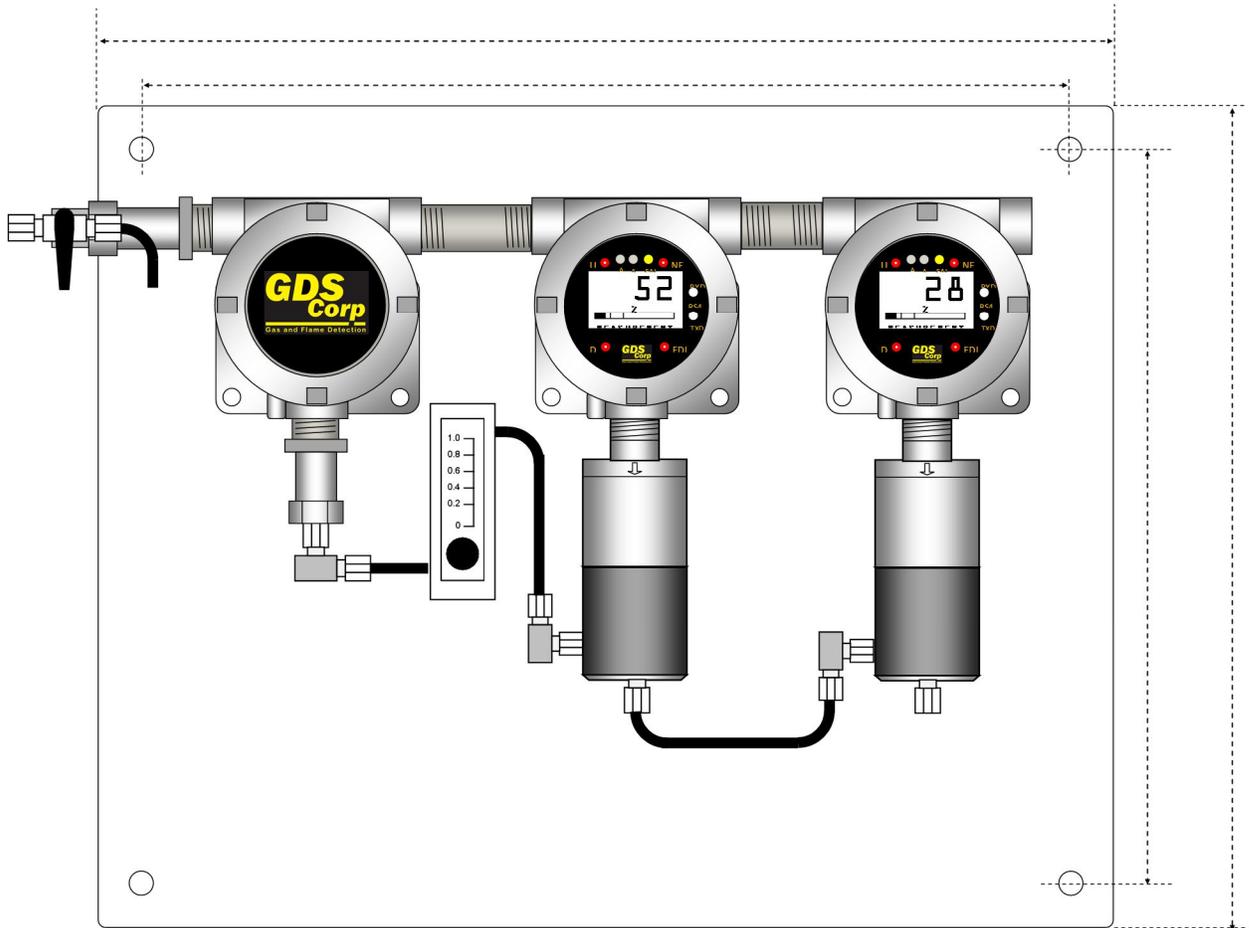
GDS-58XP 21'' x 17'' Mounting Plate Dimensions (SS Enclosures)
